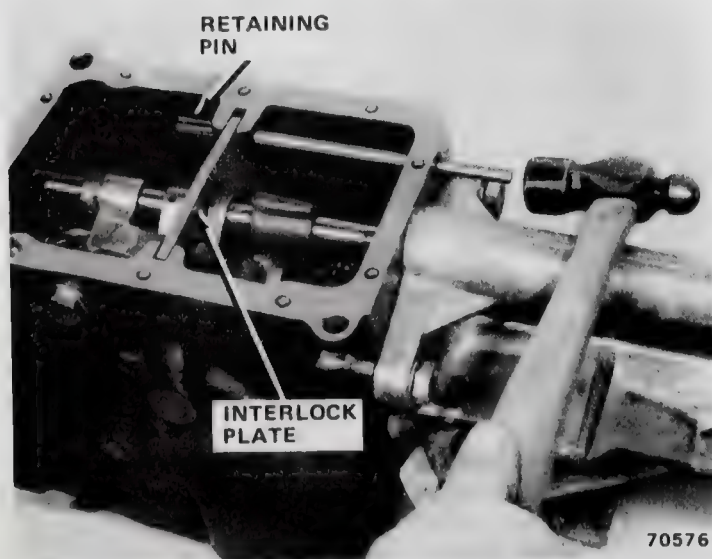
B-48 Interlock Plate Retaining Pin Removal
